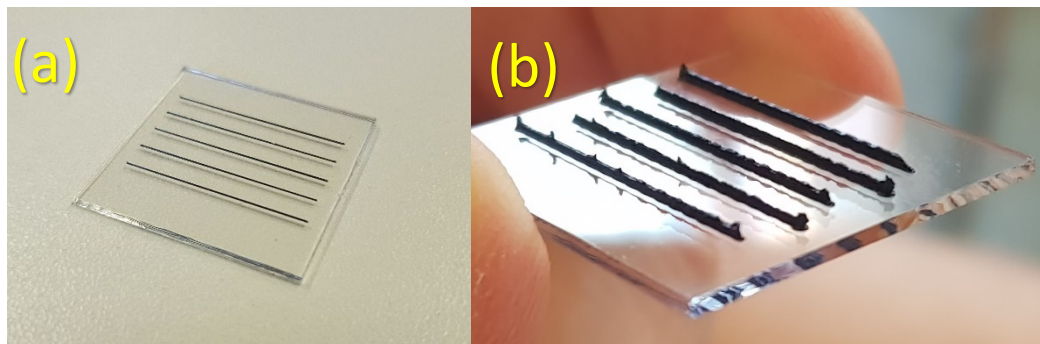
Micro-dispensed tracks for (a) 2D Printing and (b) 3D Printing
